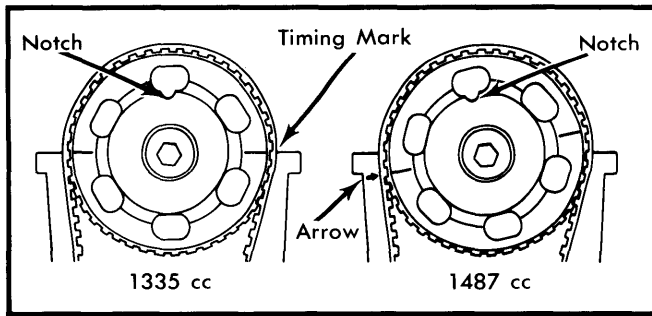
Camshaft Alignment Marks (1335 & 1487 cc Engines)
